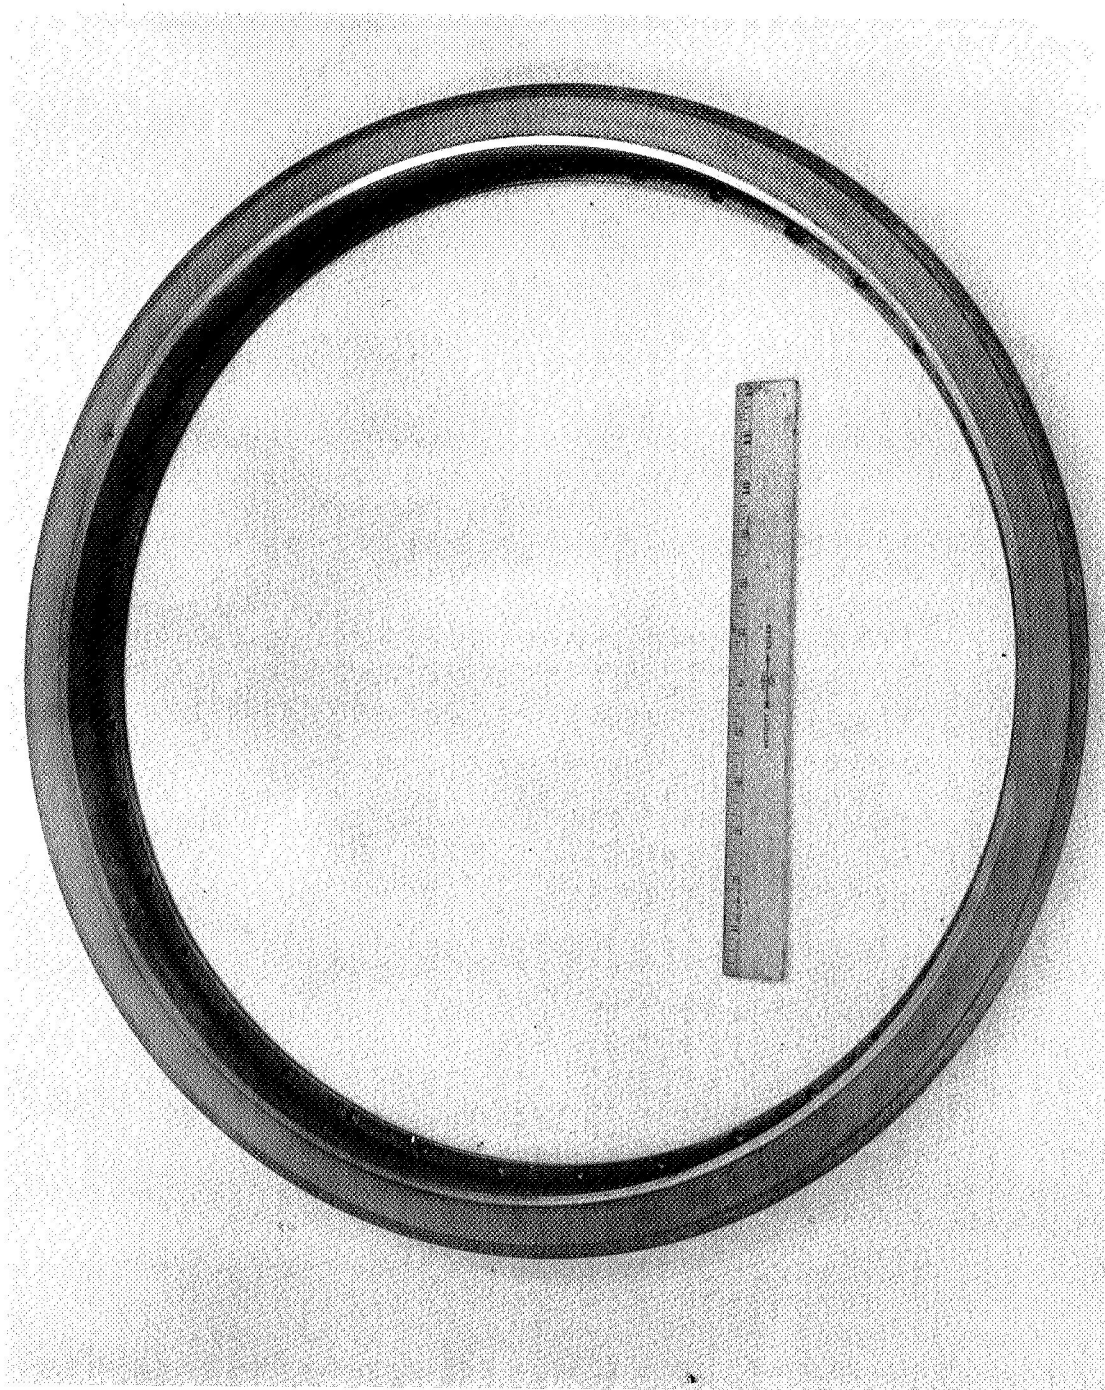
Bottom -131 Seal with Titanium-Aluminum Oxide Spray Plating
